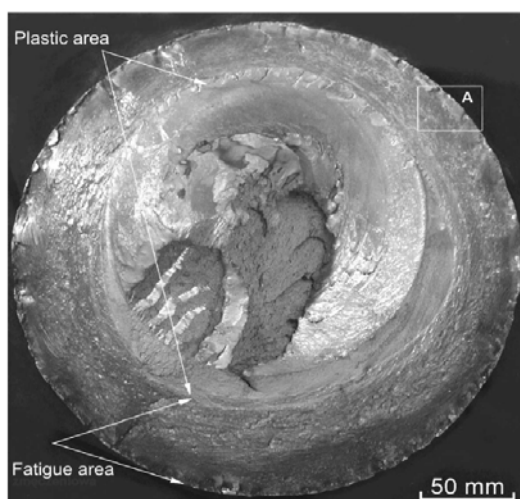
Fragment of the shaft provided for testing. Visible fatigue fracture and plastic deformation
